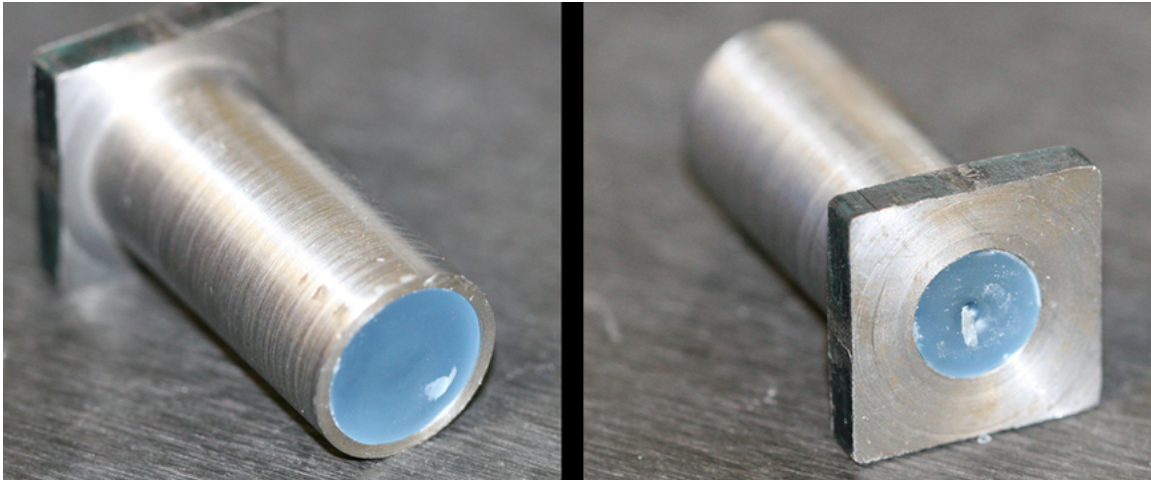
Converging diverging nozzle filled with wax to eliminate tool chatter.
